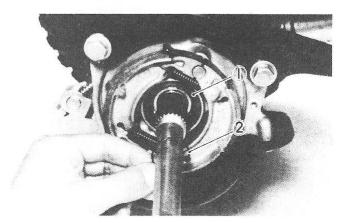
On YT 60 models, check the seal (1) and O-ring (2) before installing the brake drum (Sec 6)
